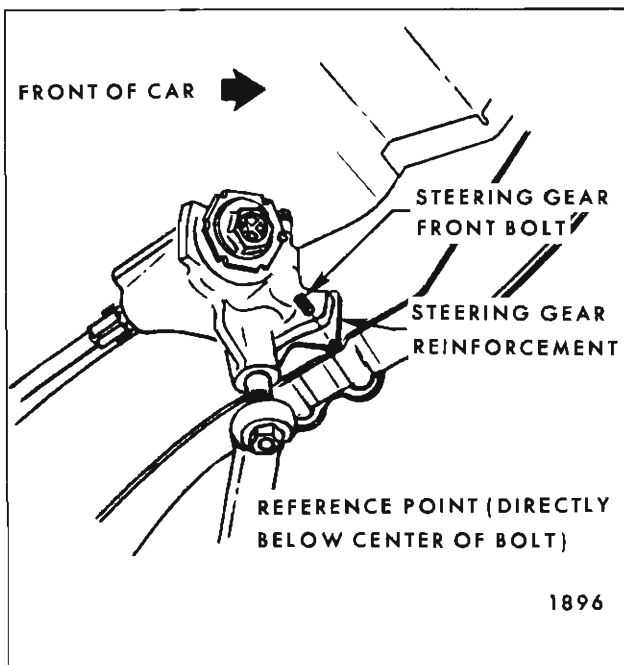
A5—Reference Point at Steering Gear Reinforcement
